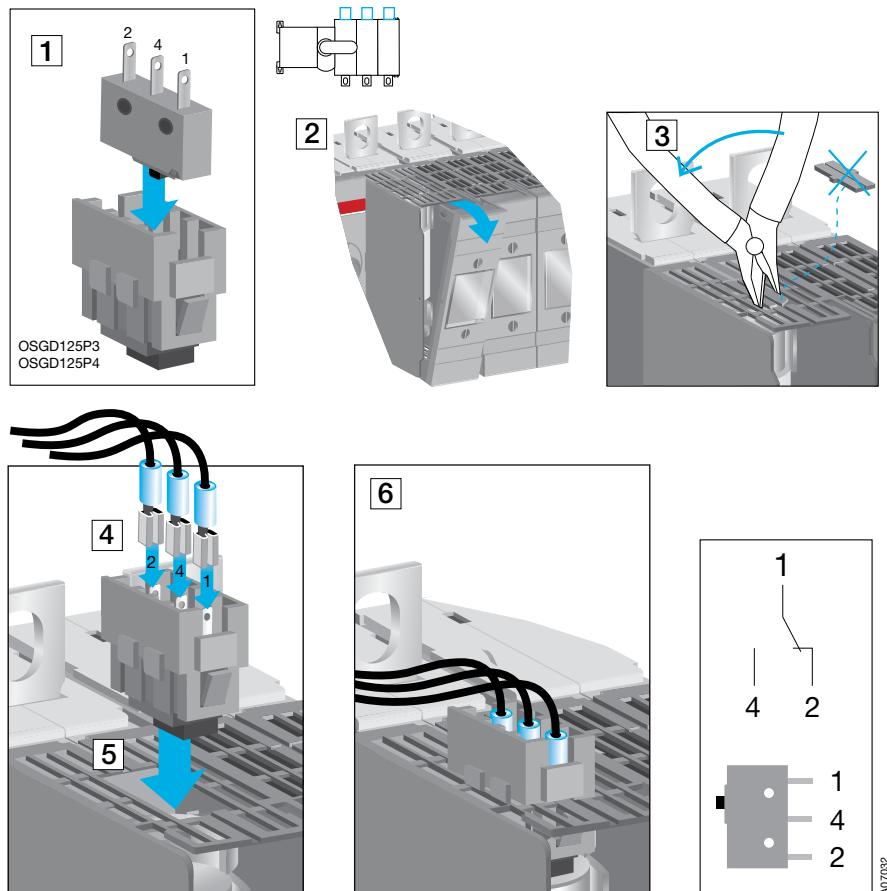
Mounting of the blown fuse indicator (DPMM) on OSM125GF_, type OSGD_, striker type fuse is needed
